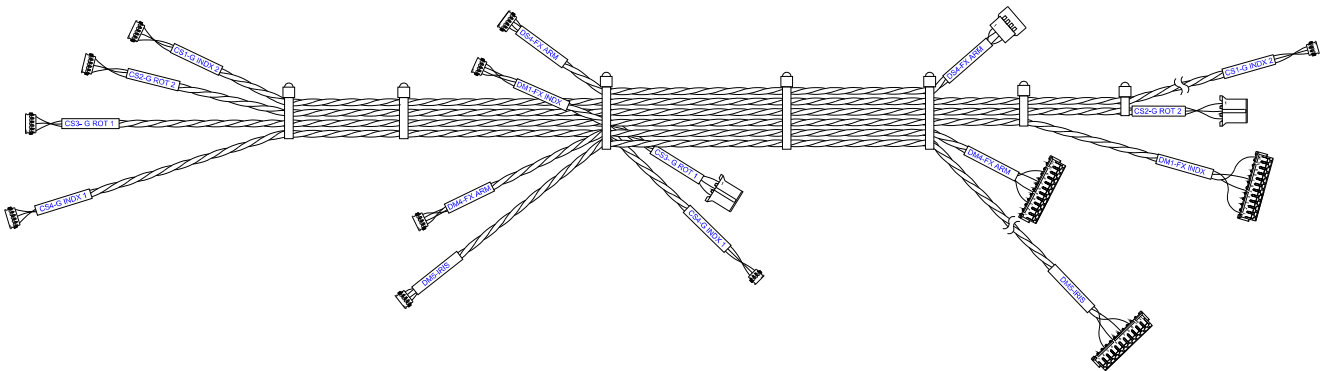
VL4000 BeamWash Gobo Bulkhead 2 Cable Assembly
